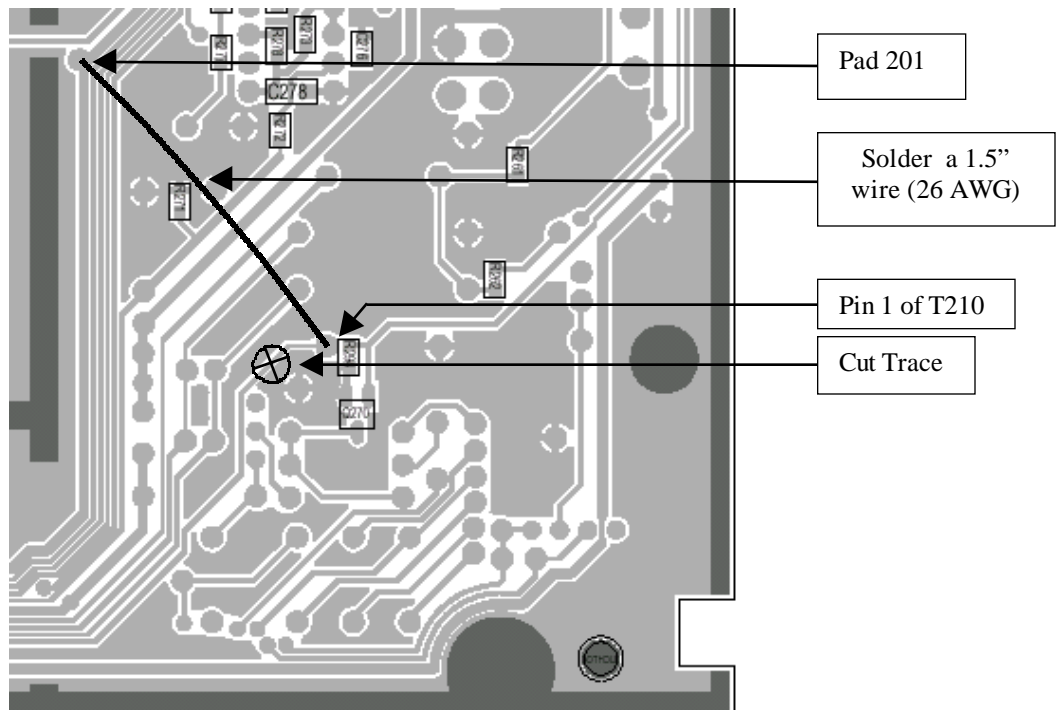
855 Receiver PCB, Bottom Side (EEPROM module) 2/4
